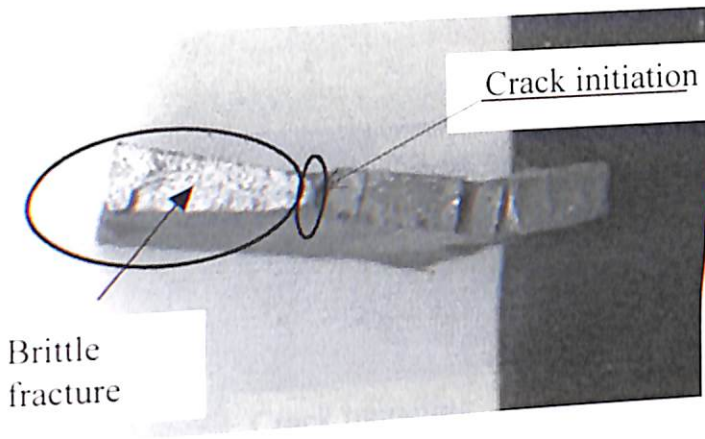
General features of fracture surfaces produced at crack initiation in EDD277.
